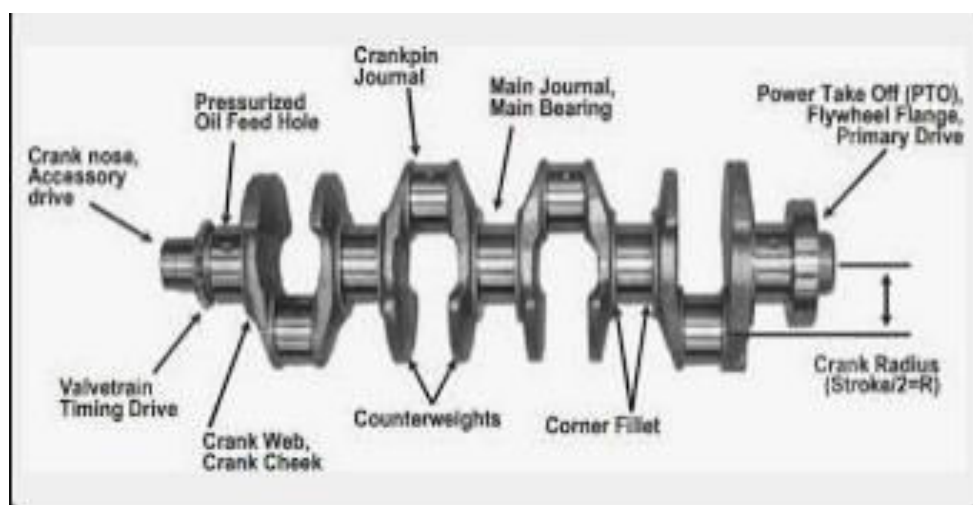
Typical Crankshaft with main journals that support the crankshaft in the engine block.
